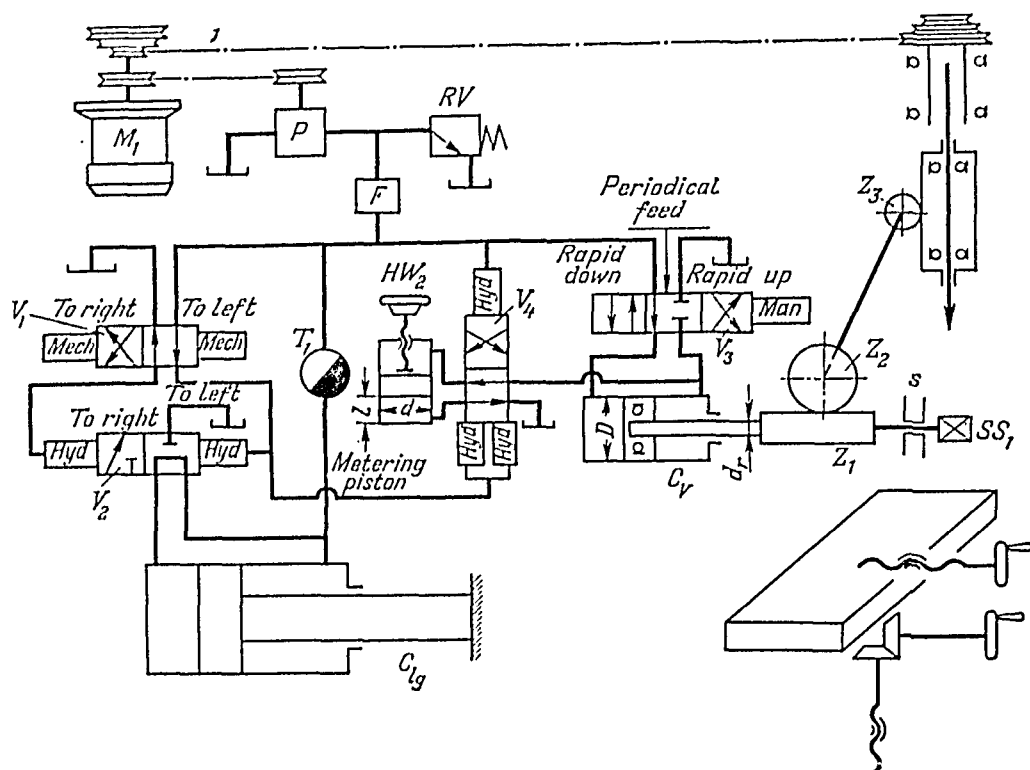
Combined hydraulic circuit and gearing diagram of the model ДФ-82Д keyway milling machine
